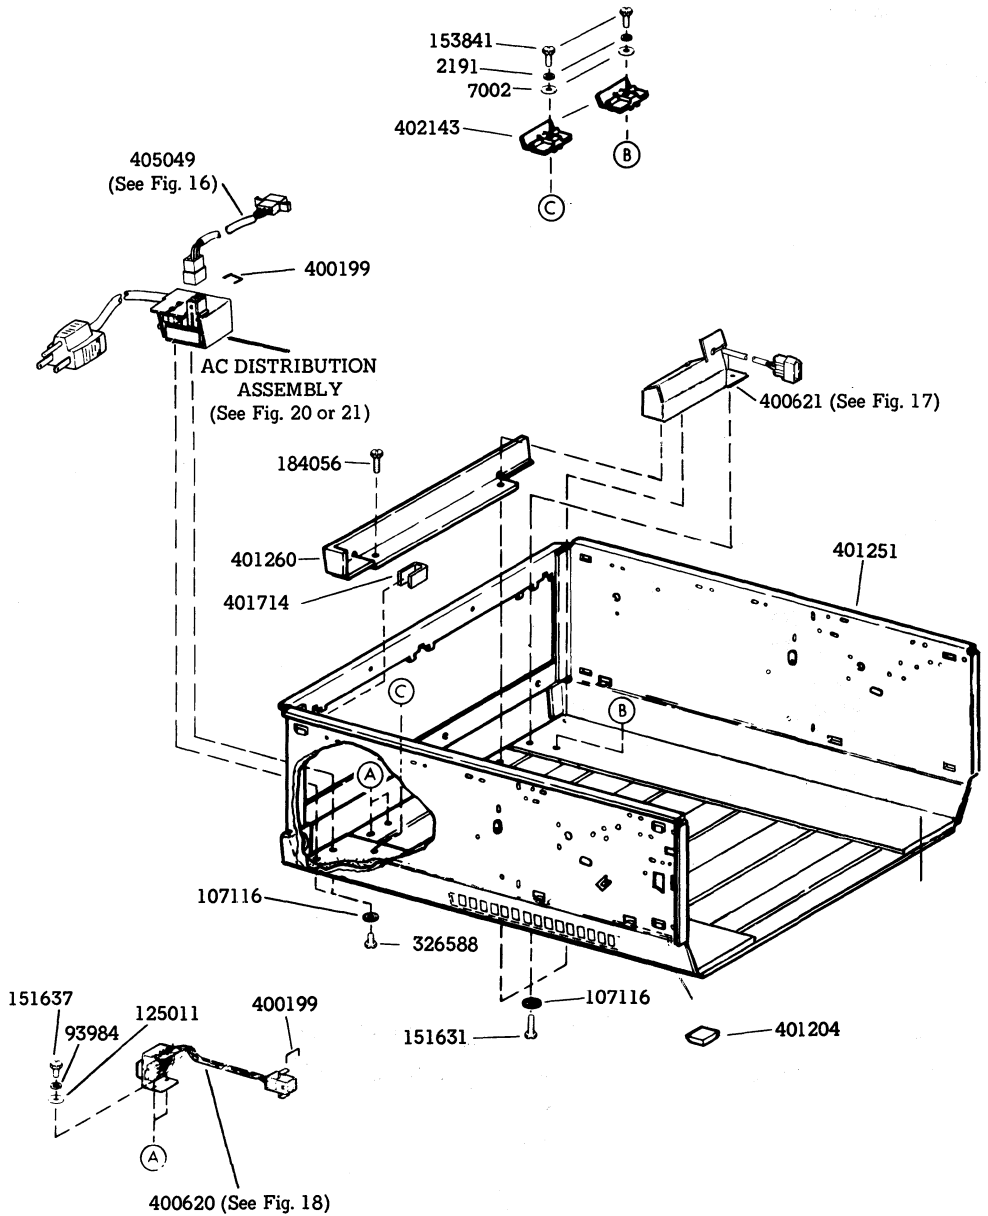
CAB251/AA Printer Under Monitor Cabinet
